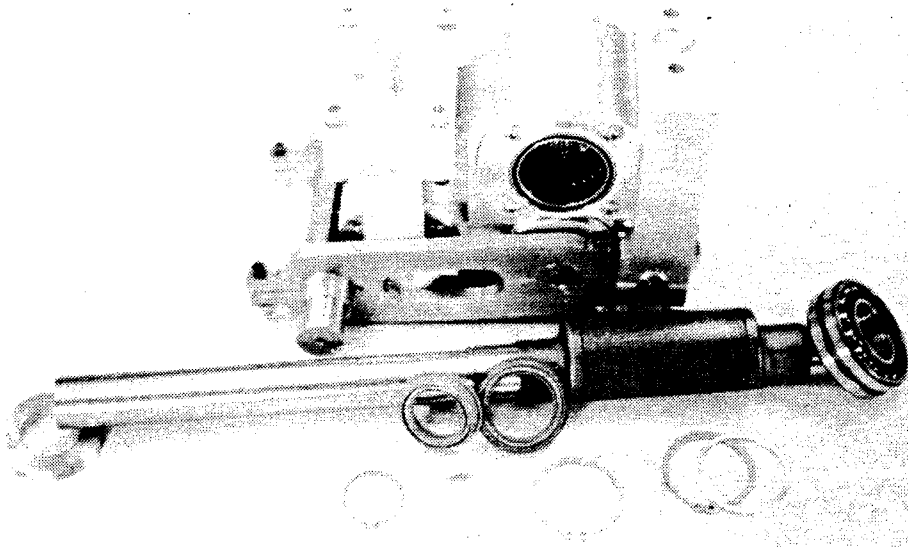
DRIVE MECHANISM YOKE, PISTON RODS, SWINGLINK, AND CRANKSHAFT
